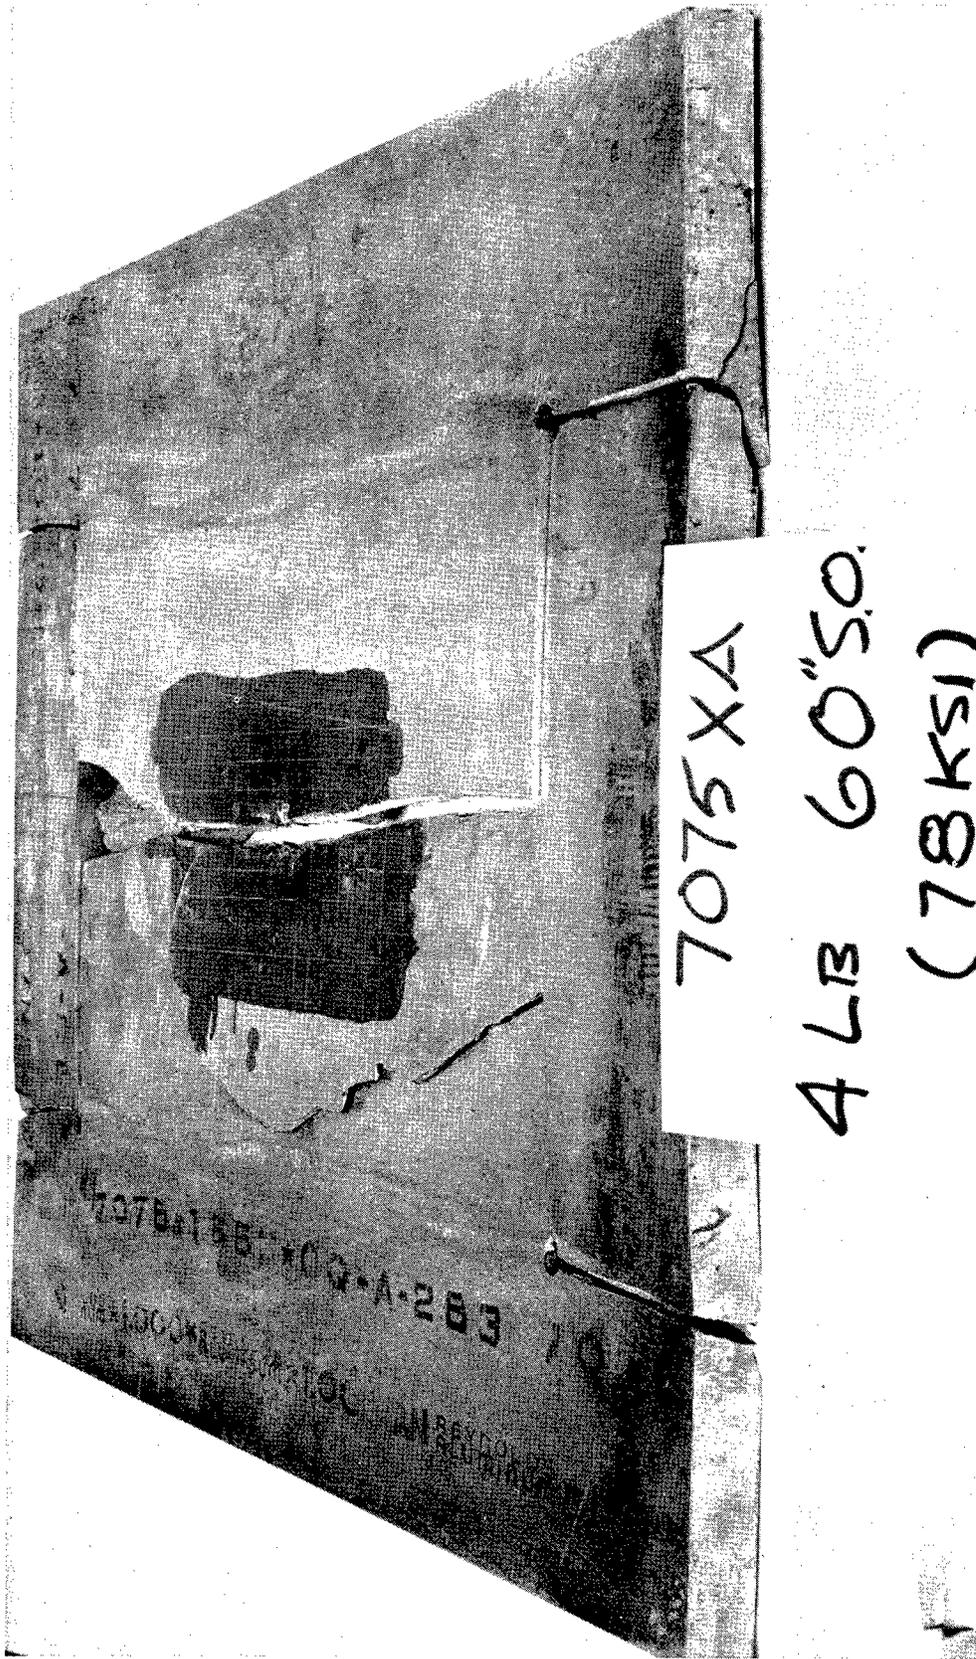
Explosion tear test plate of 7075-T6. Failure occurred under elastic conditions in the presence of a 2-in. flaw.
